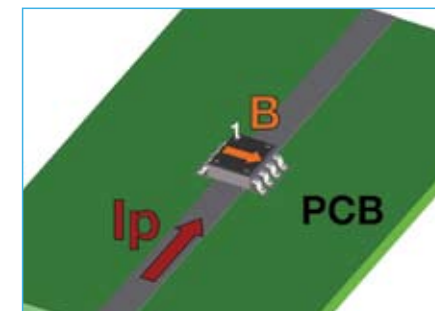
One possible PCB design: the track is located underneath the Minisens.
